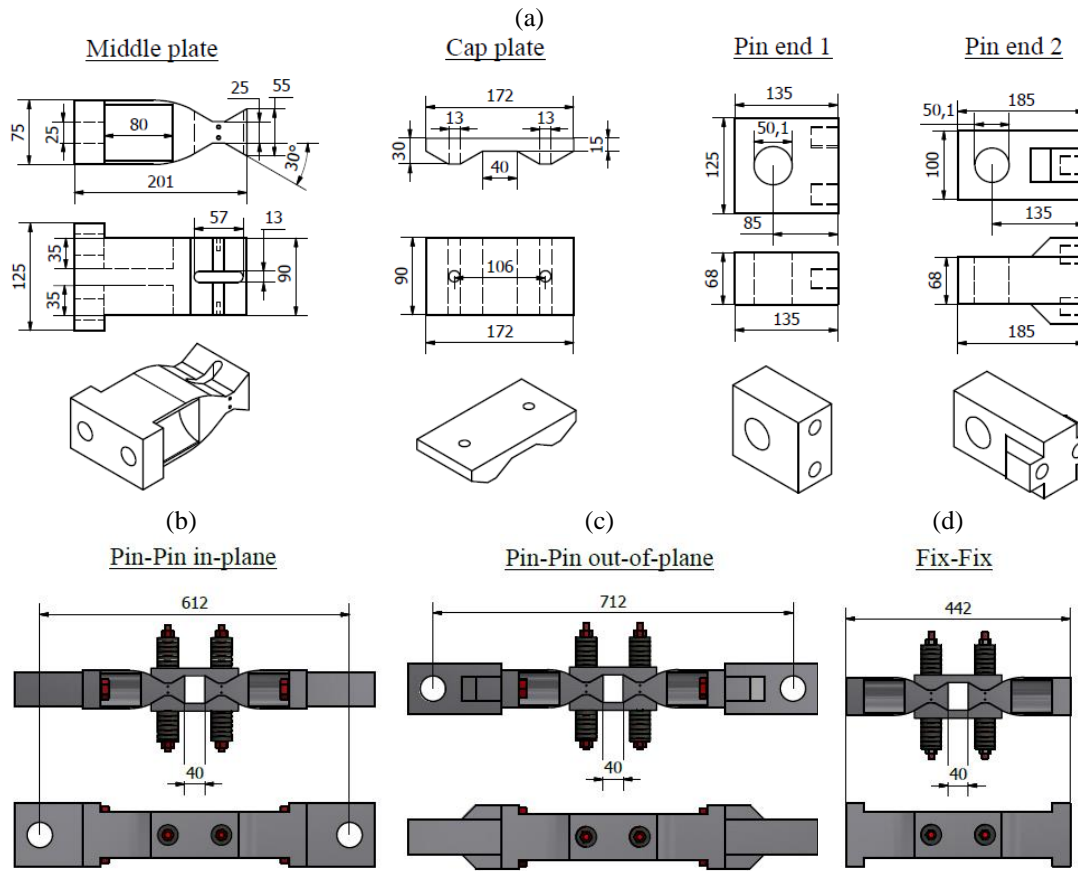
The RSFJ designed for testing: (a) middle and cap plates, (b) assembly with pin-pin end in in-plane, (c) assembly with pin-pin end in out-of-plane, (d) assembly with fixed – fixed end
